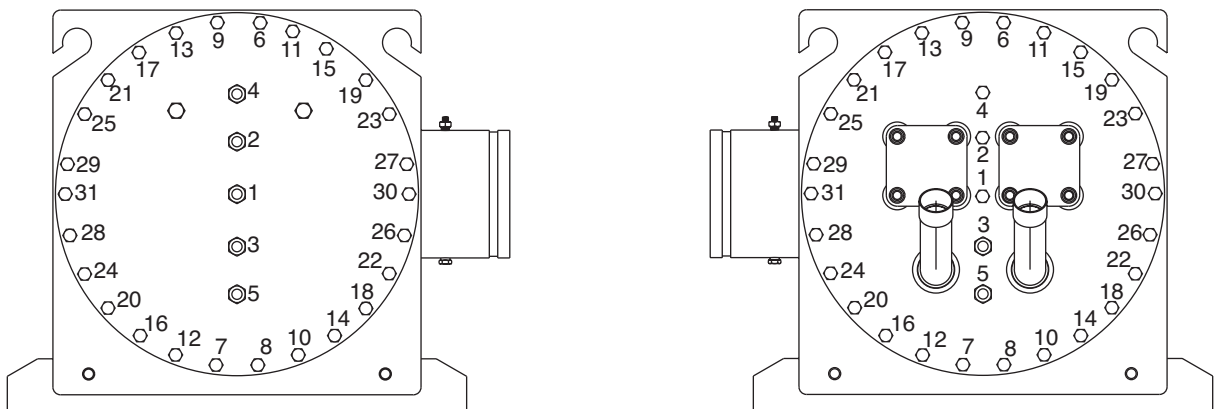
Bolt Tightening Sequence, 30RB150-190, 315A/B, 345A/B, 360A/B, 390A/B
